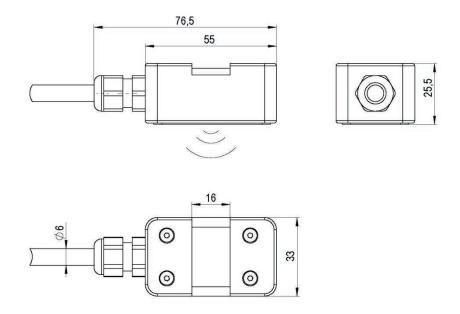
Dimensioned drawing clamp-on sensor Type NIC-CO01
